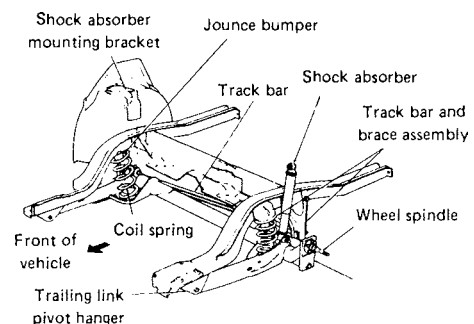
Trailing-arm type rear suspension with coil springs, used on some front-wheel-drive cars. (Chrysler Corp.)
